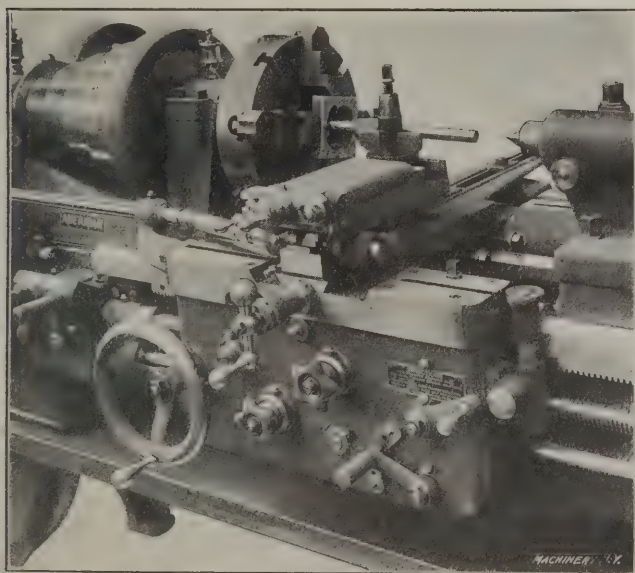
Relieving Attachment of American Tool-room Lathe being used for Internal Work
